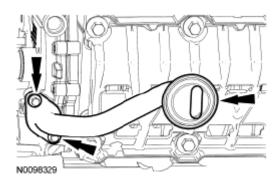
Locating Oil Pump Screen And Pickup Tube Courtesy of FORD MOTOR CO.
